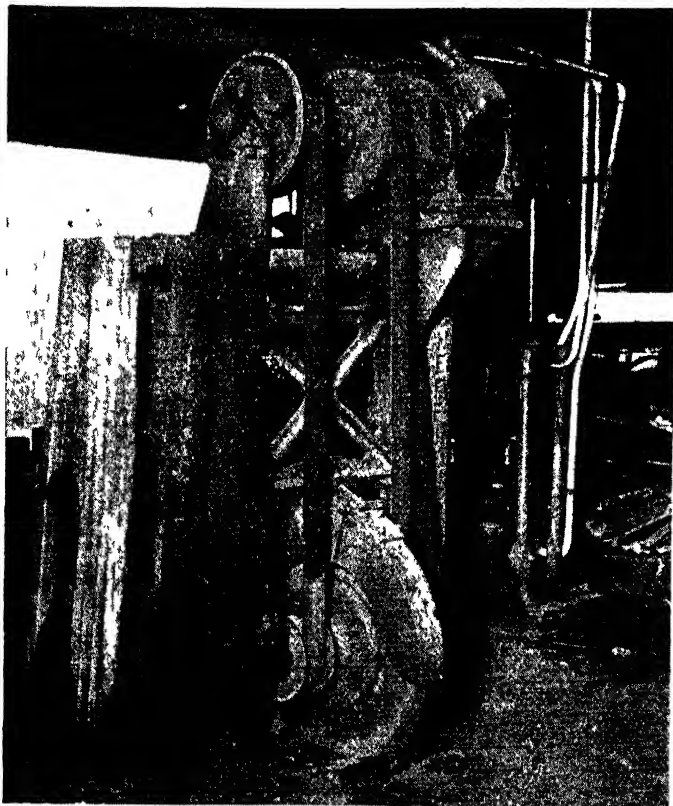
SLIP-RING MOTOR DRIVING A HOT SAW
